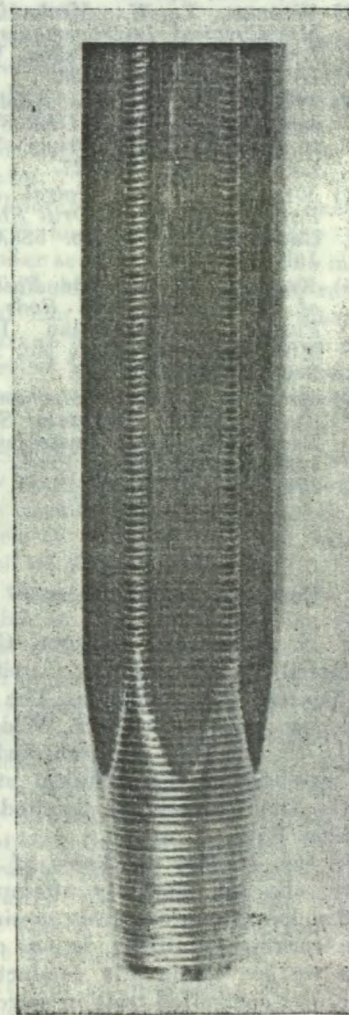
Spiral-rolled drill steel with tapered attachment.
